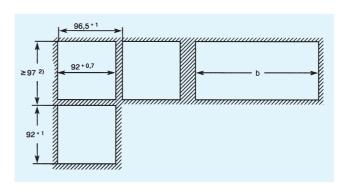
/13 SIPART DR19 controller, dimensions in mm
